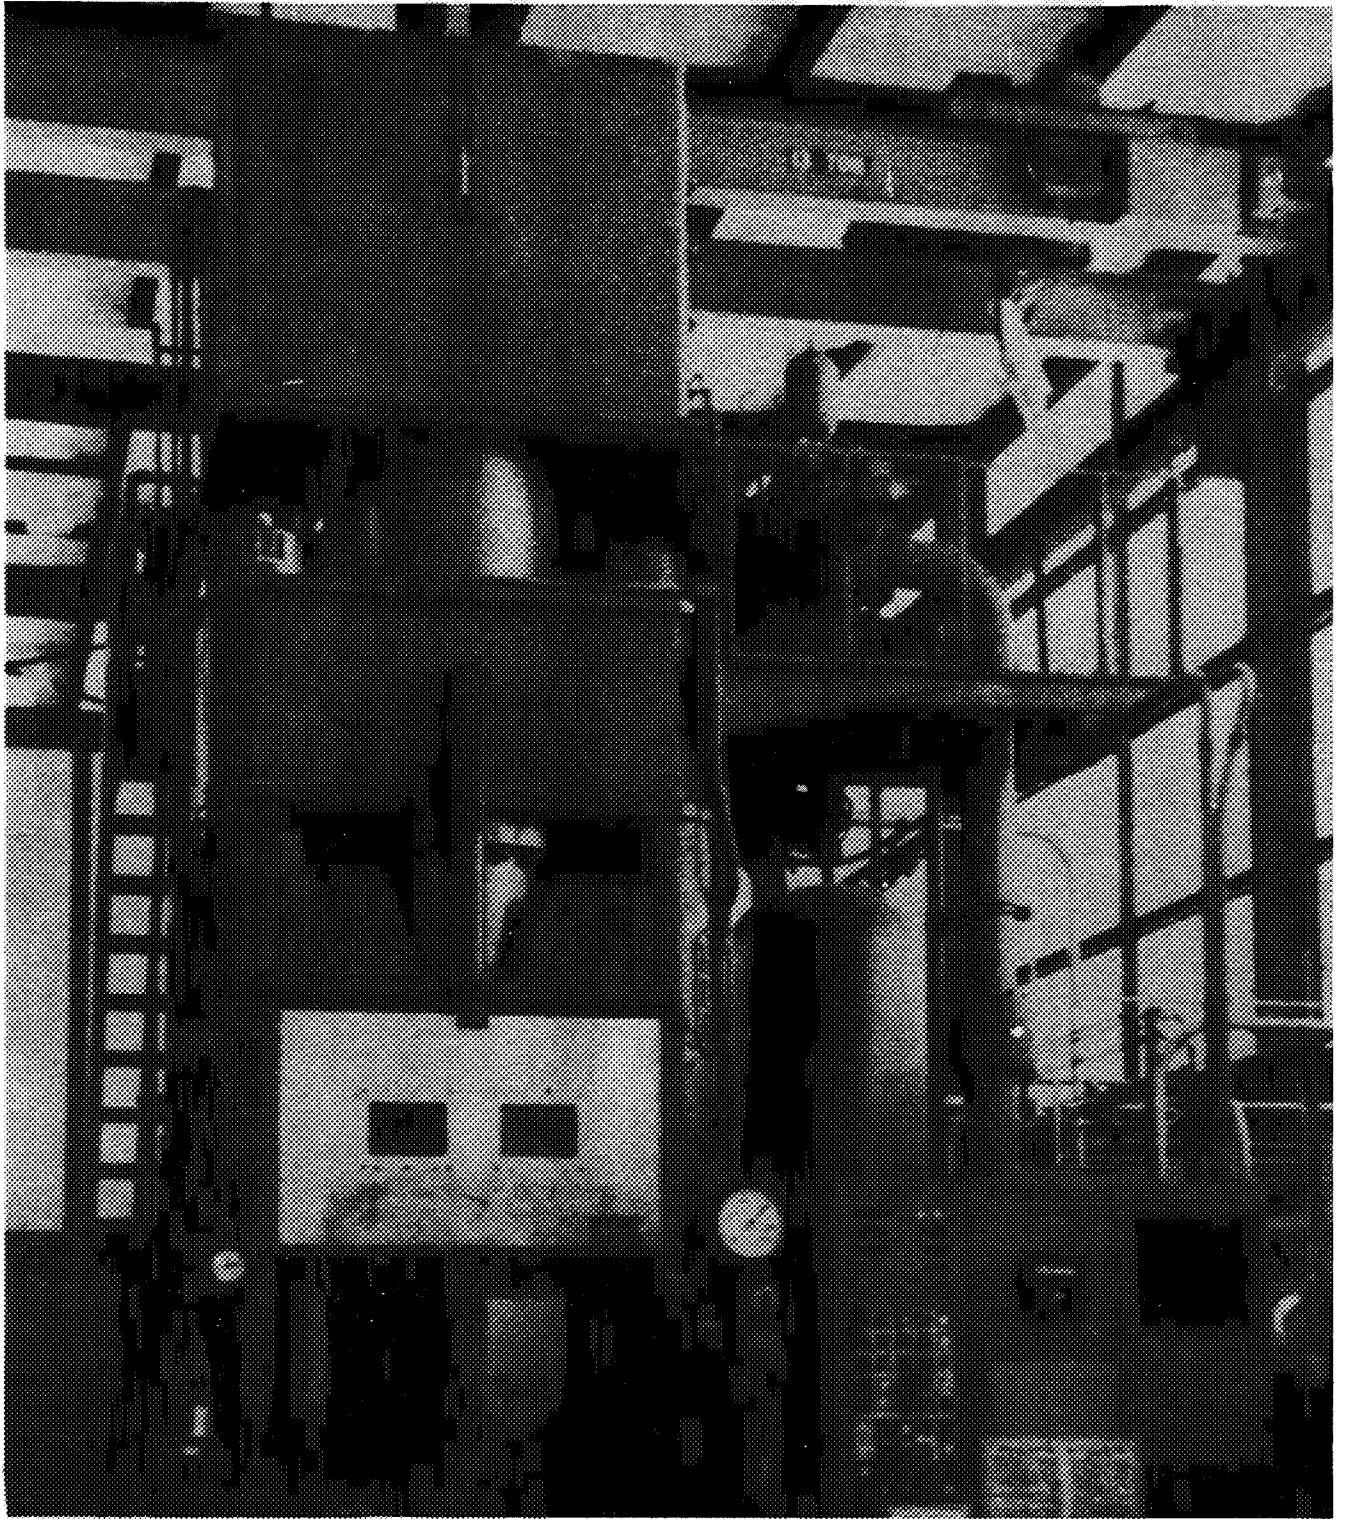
One-thousand-ton hydraulic press used to make the squeeze castings.
